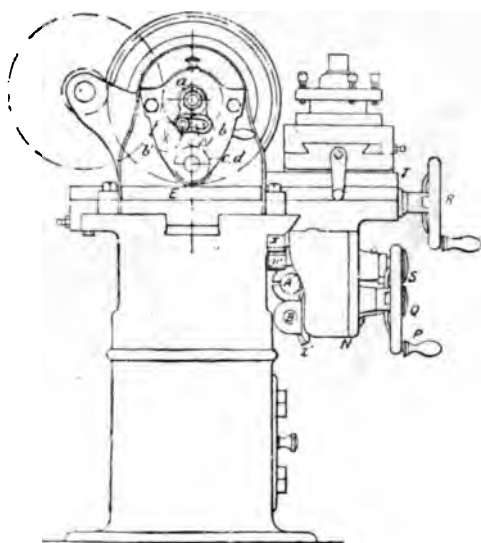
Screw-Cutting Lathe. (End Elevation.)
